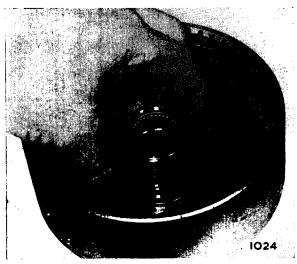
Fitting the "O" ring on the rear clutch hub.
